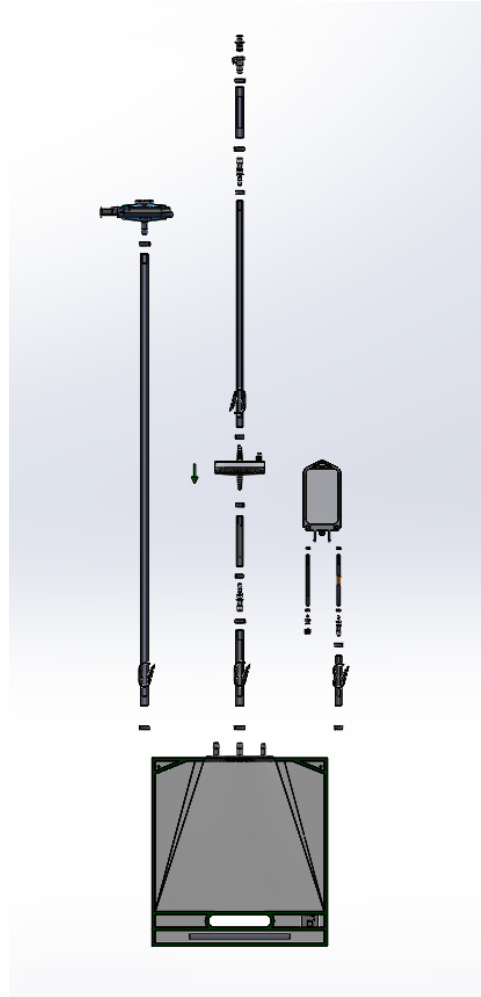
Sample Assembly 2 (40 total components) from MilliporeSigma
